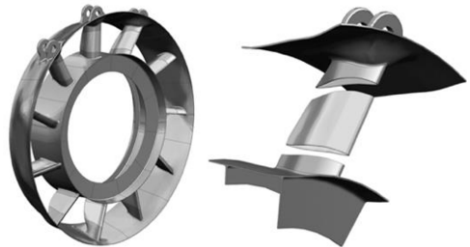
The TRS divided into segments, which are welded together in an assembly process.
